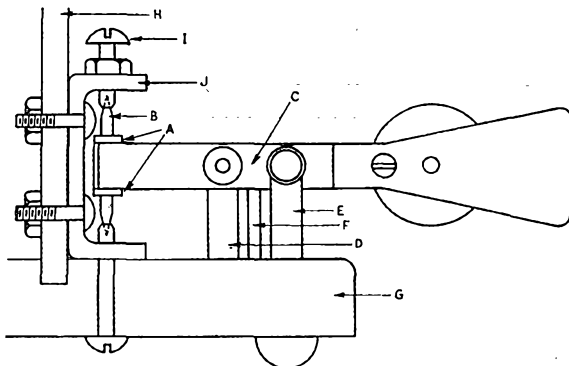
Side view of electronic key movement, illustrating bearings and supports of moving parts. (A) Ears on lever *A* (see photograph) (B) Pivot spindle. (C) Keying lever. (D) Dot spring post. (E) Dash spring post. (F) Dot stop. (G) Key base. (H) Control panel. (I) Pivot screw. (J) Pivot support.
